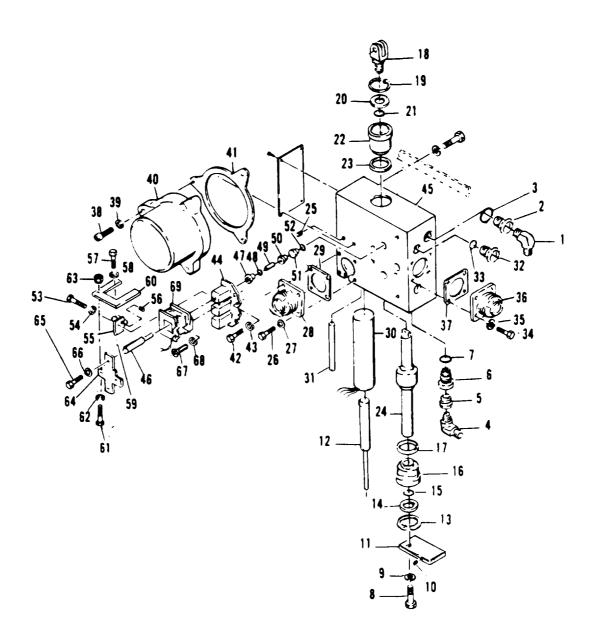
Hydraulic Actuator Unit, Exploded View (Sheet 1 of 2) (Electro-Hydraulic Governor Equipped Precise Sets Only)
